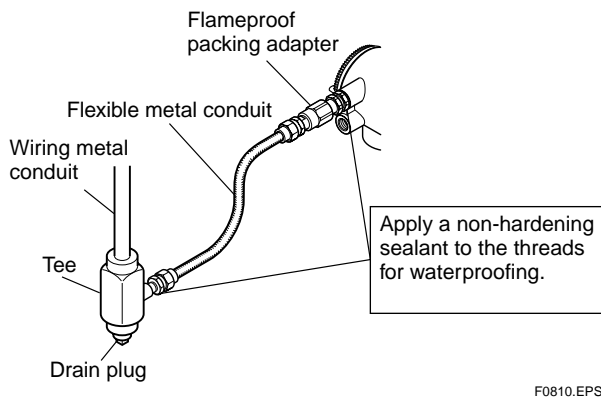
Typical Wiring Using Flexible Metal Conduit
